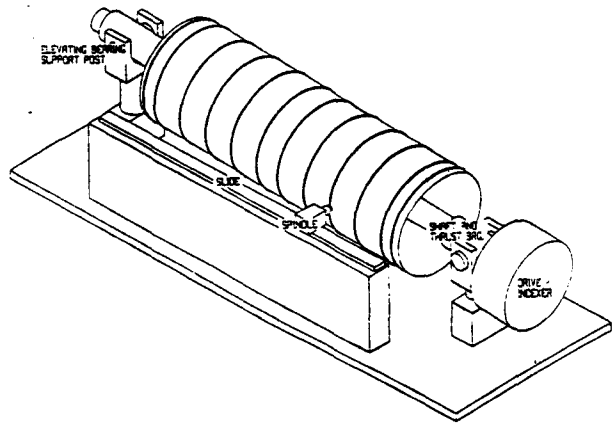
Machining of the shim rings on a completed cylinder.
